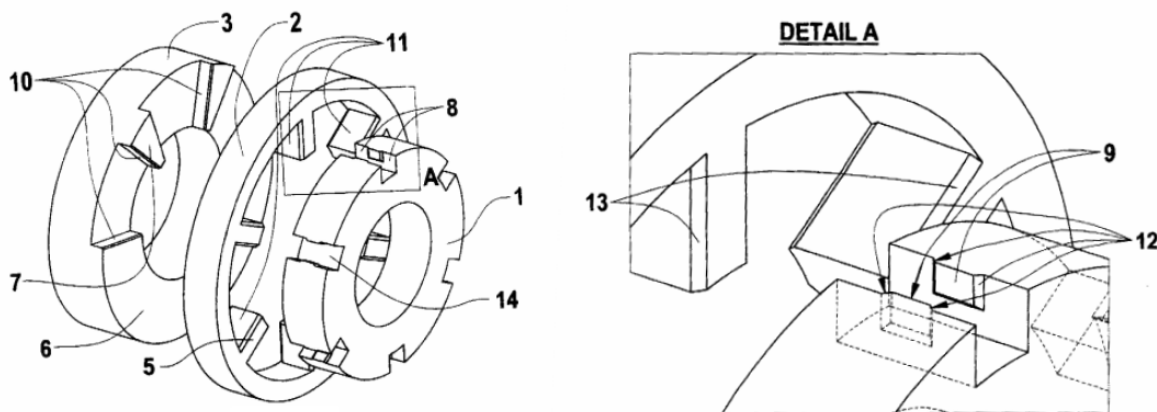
Dog clutch with rectangular dogs – exploded and detailed view [21]
